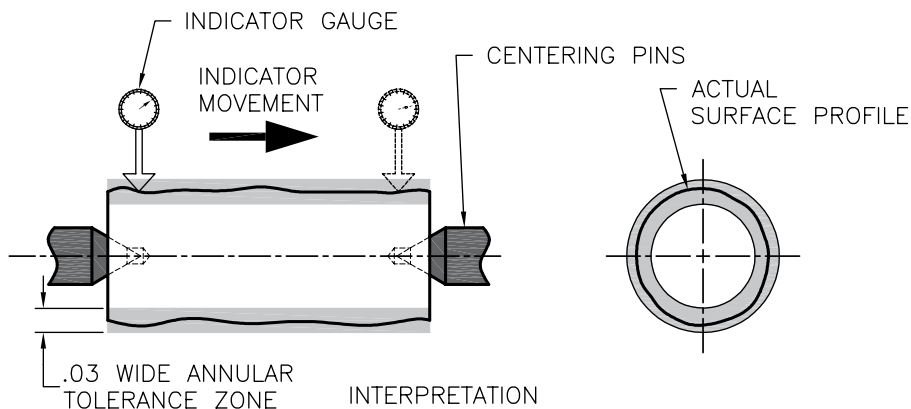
Measurement of tolerance zone for total runout
